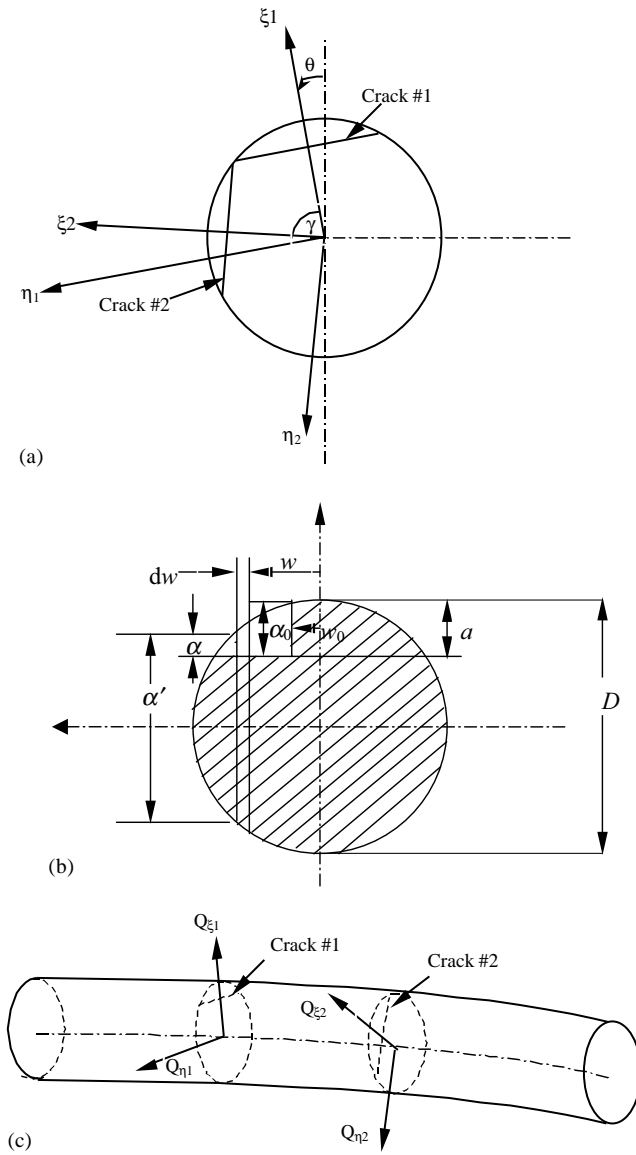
Details of a two-crack Jeffcott rotor. (a) Co-ordinate system. (b) Details of a crack cross-section. (c) Forces acting on the rotor at the crack cross-sections.
